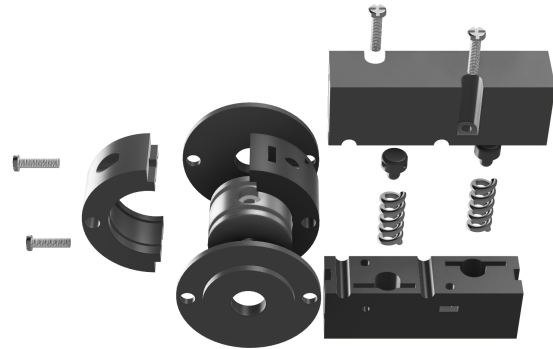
Exploded view of the control box, showing the actuation wheel and the springs inside the tensioning system
